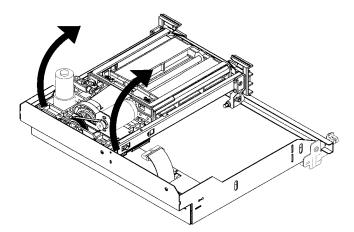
Rotating the Picker Assembly Out of the Translate Frame
